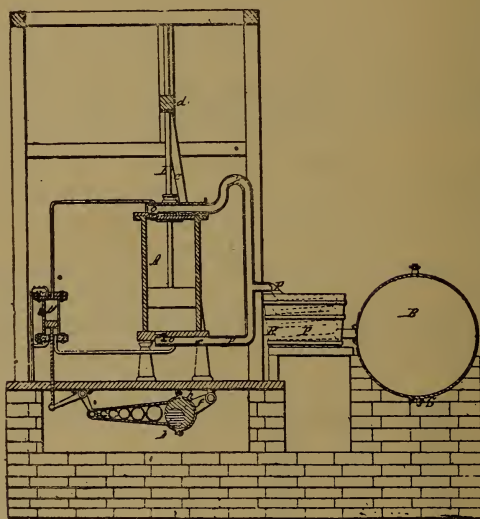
END VIEW—THE EARLIEST ICE MACHINE.
